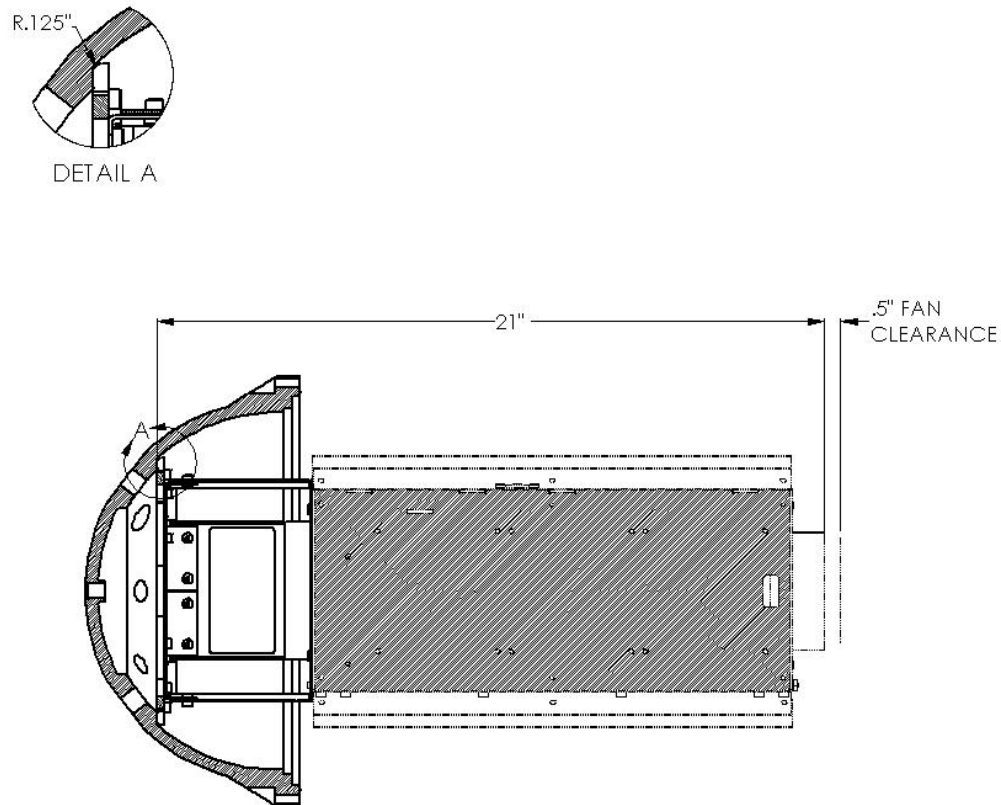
7-I Integrated Control and Processor Unit Fastened to End Cap
